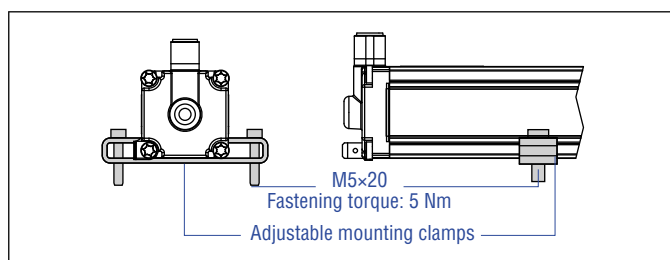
Mounting clamps with cylinder screw M5×20 (part no. 403 508)
